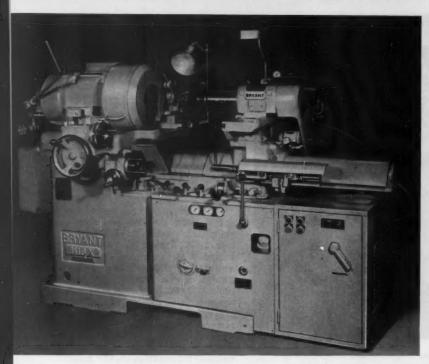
Hydraulic internal grinding machine for finishing ring gage bores to a surface finish of 1 micro-inch r.m.s.
